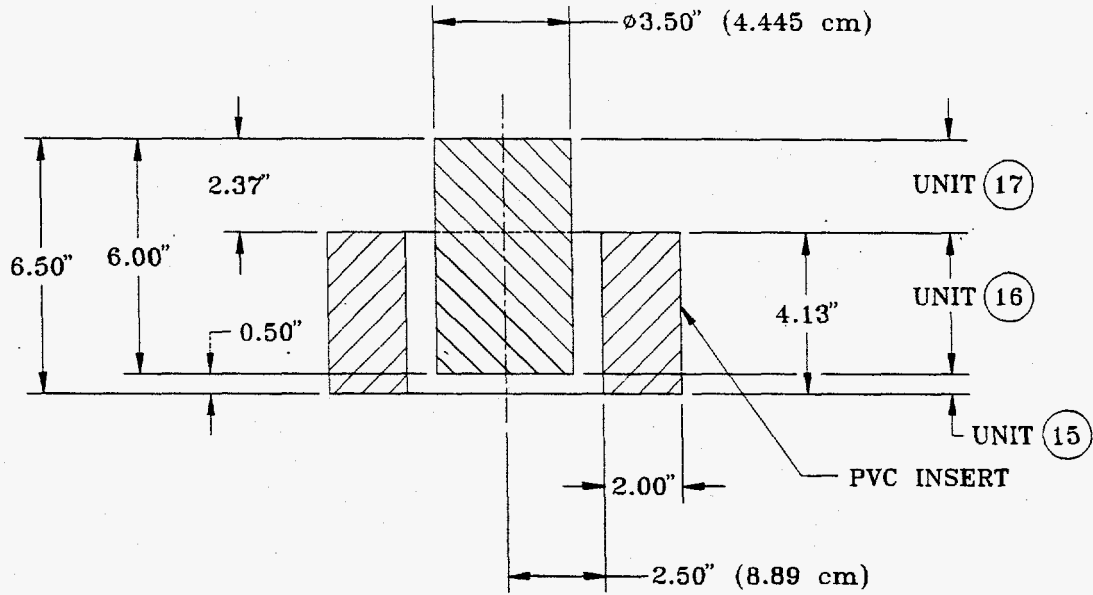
Model of Units 14, 15, 16, and 17: flange section and motor assembly.
